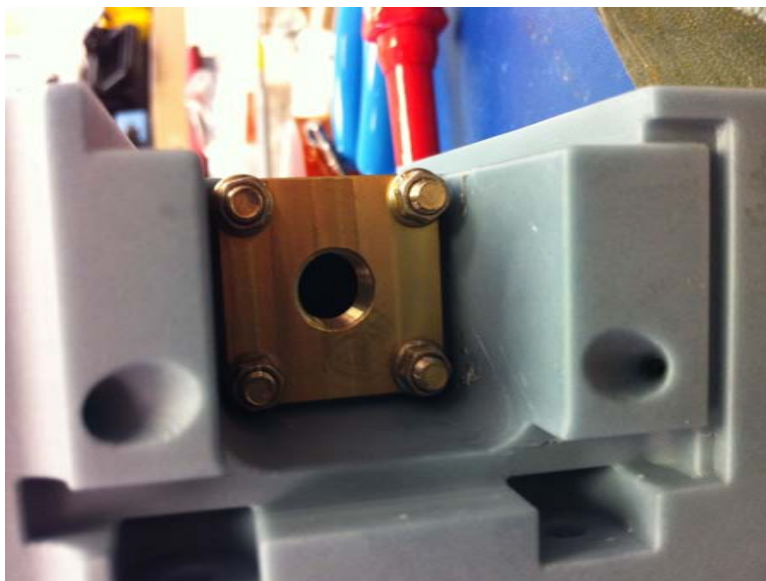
Angled and canted 3D printed FTT thruster nozzles
